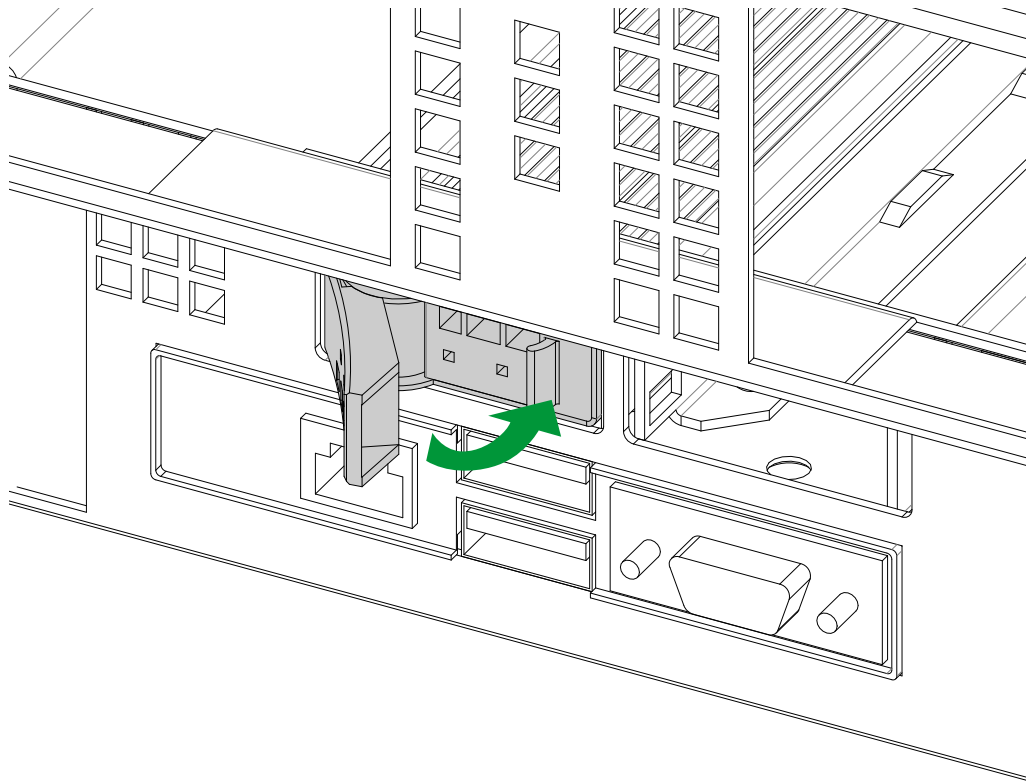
Close the Latch To Lock the M.2 Drives in the Slot
